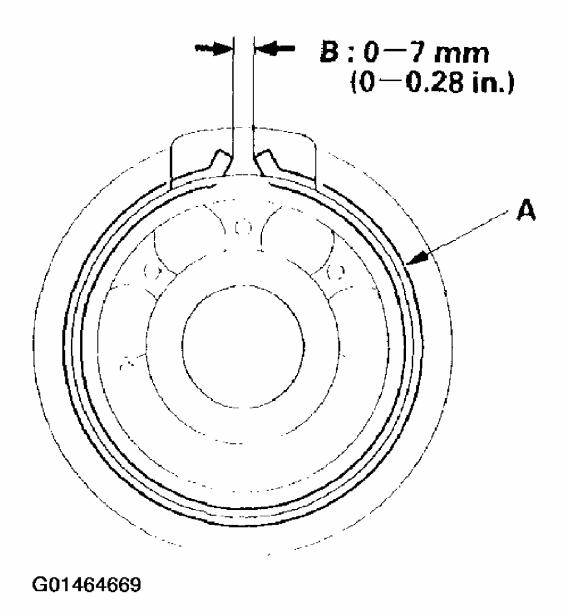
Verifying The Snap Rings Are Seated In The Bearing & Housing Grooves, & The Ring End Gaps Are Correct Courtesy of AMERICAN HONDA MOTOR CO., INC.
